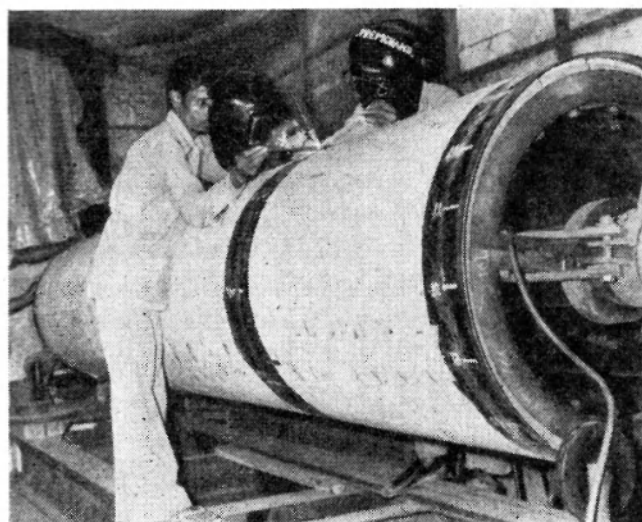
Circumferential Seam Welding of motor casing segment by TIG Process.
